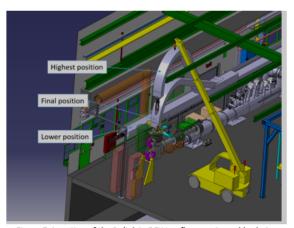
Insertion of the Sc link in DFX top flange using cable chain
